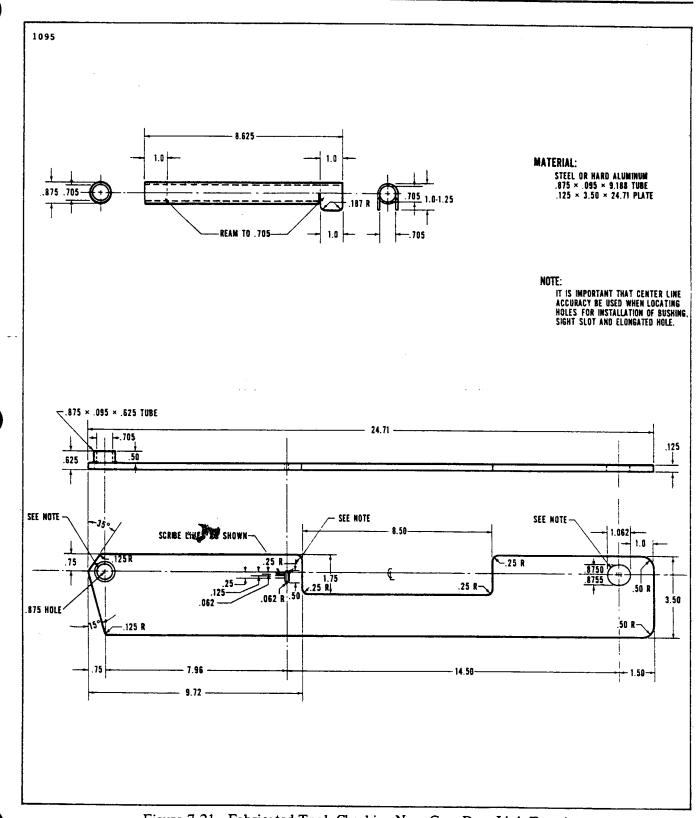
Fabricated Tool, Checking Nose Gear Drag Link Travel
